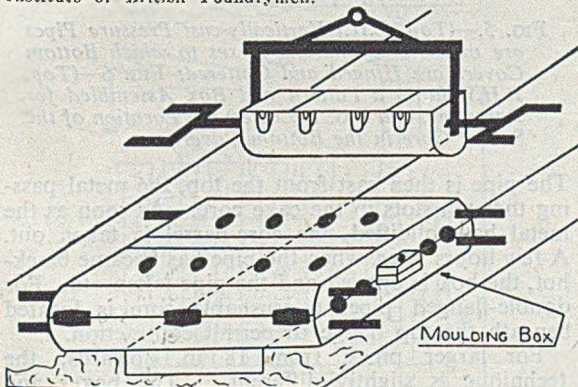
Method of Casting Soil and Ventilation Pipes using a Four-spoated Teapot Ladle. Four Castings are made per Box.
